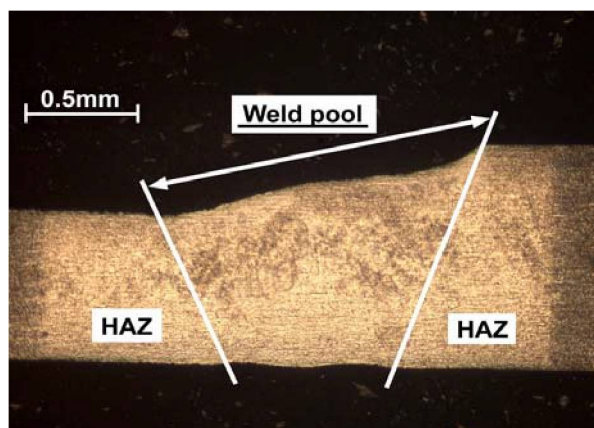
The cross-sectional weld profile of weldment obtained from an acceptable Ti-TWB (0.7mm/1.0mm) [24].
